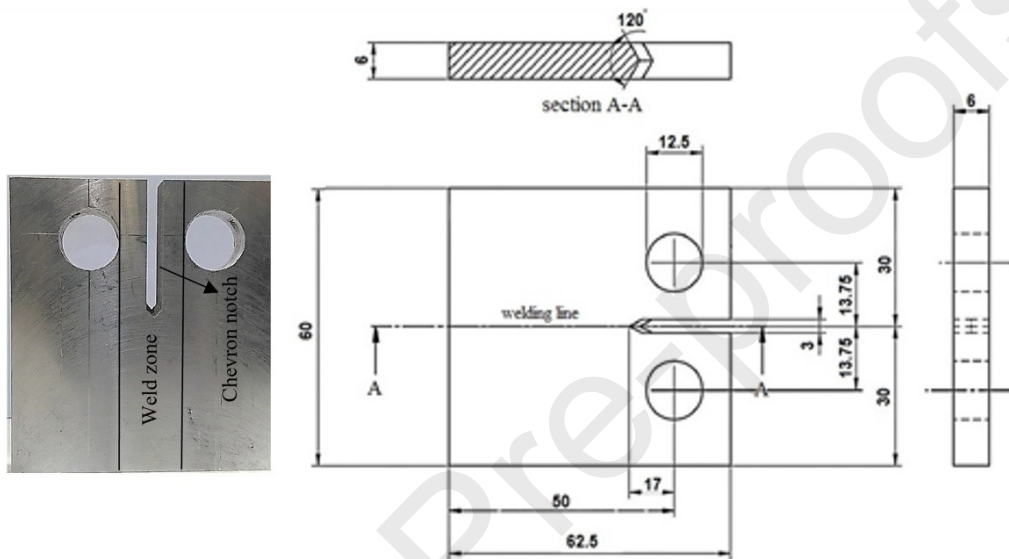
The final prepared CT specimen for fatigue crack growth test (dimensions in mm).
